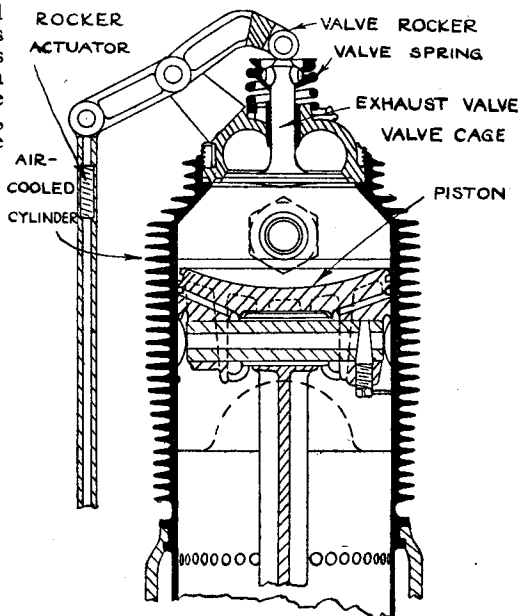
Section of Monosoupape engine cylinder, showing single valve in head and row of transfer ports around base
